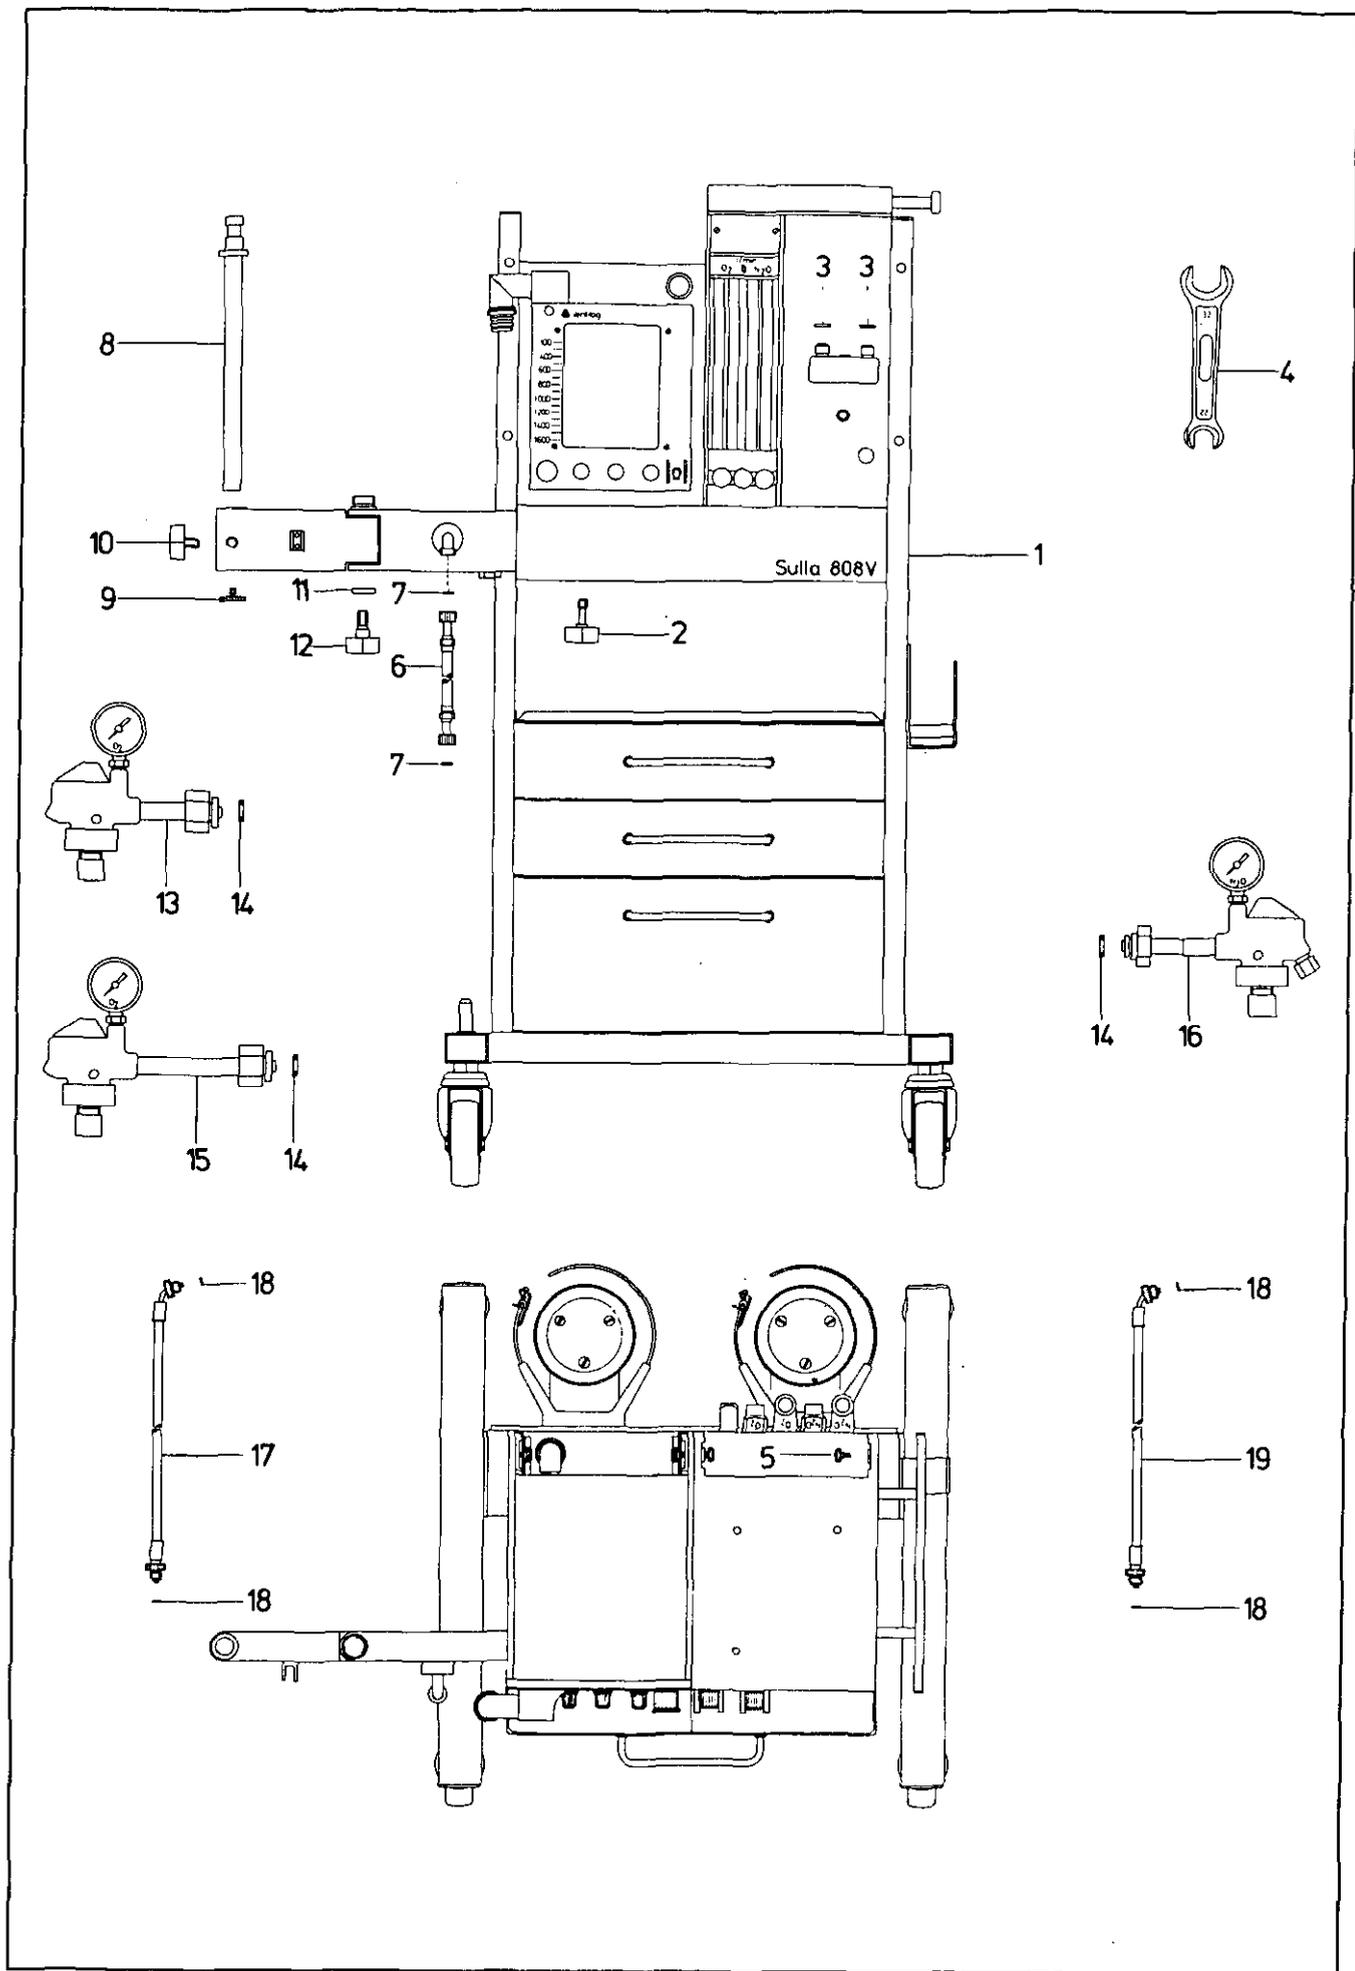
Component parts of Sullia 808 V (see Parts List)
